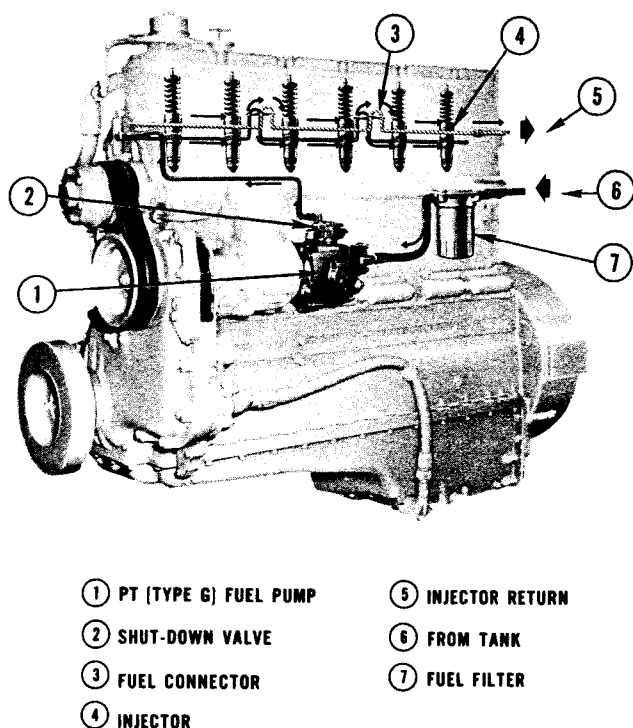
, (FWC-13). Fuel flow schematic — N/NT-855 Engine
